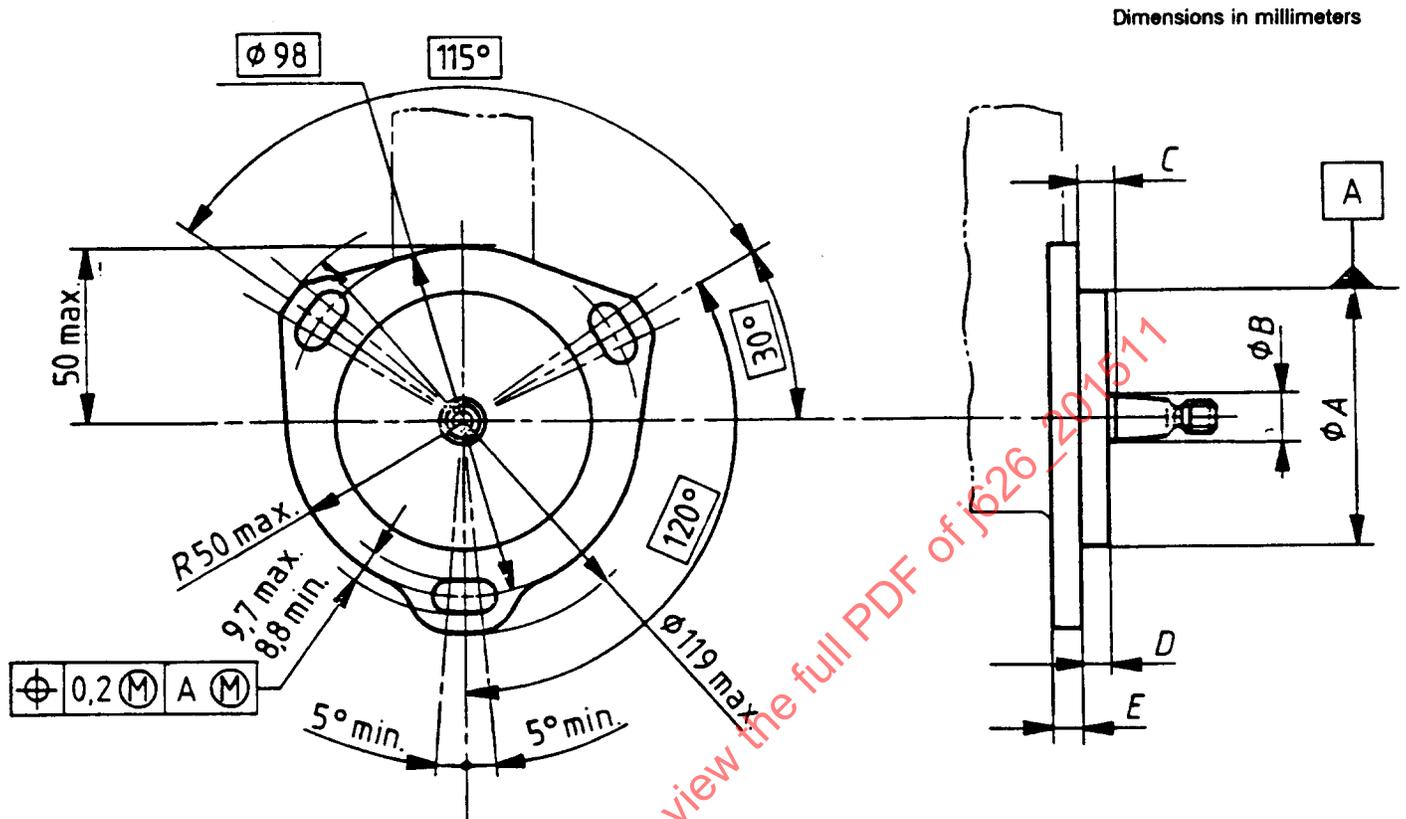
FUEL INJECTION PUMPS—TYPE 5 END-MOUNTING FLANGE
